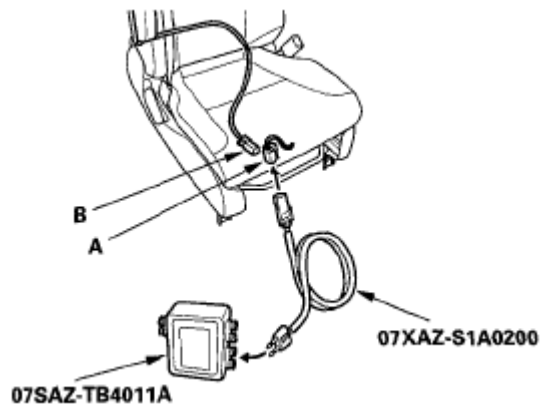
Identifying Floor Wire Harness 2P Connector And Front Passenger's Side Airbag
